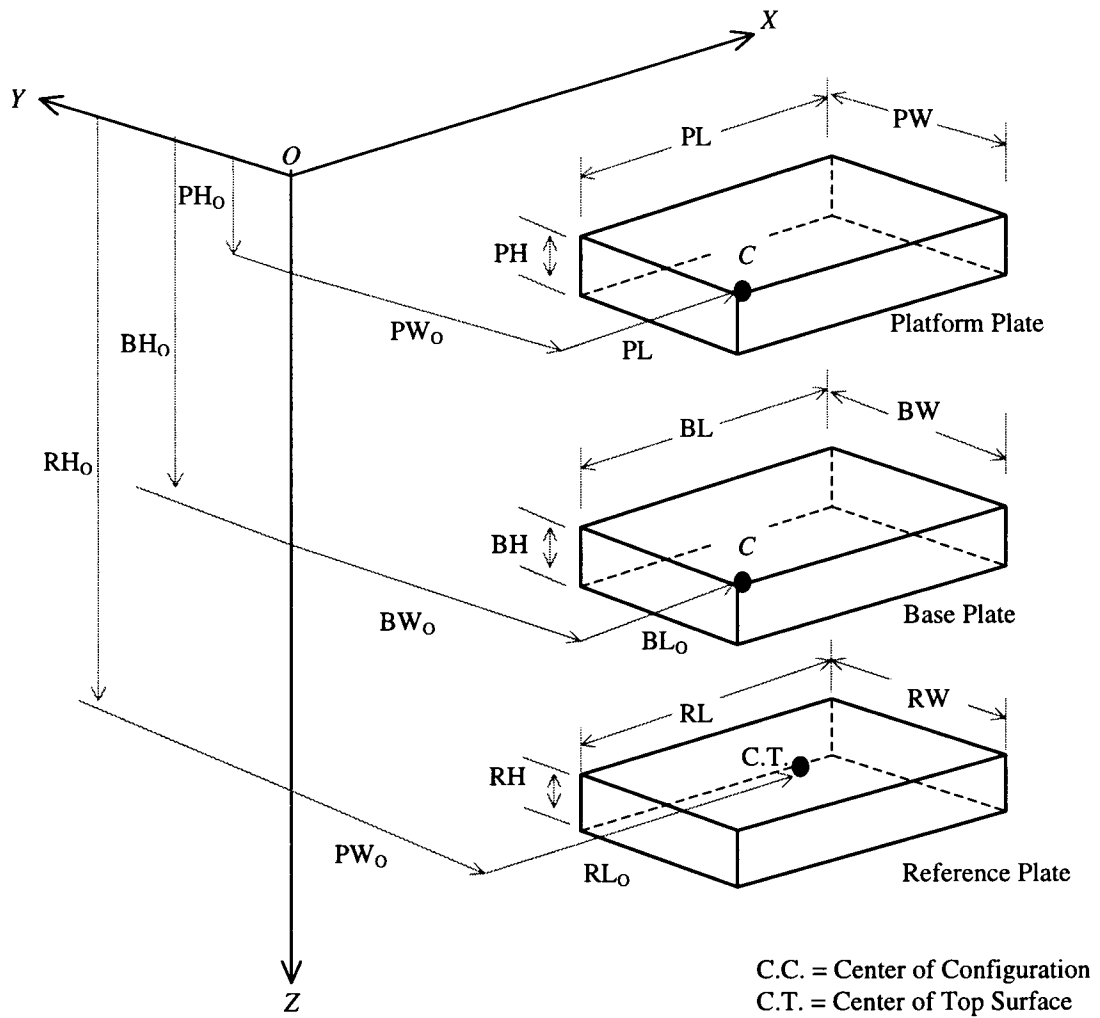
Dimensions used in the 'corner reference' drawing option.
